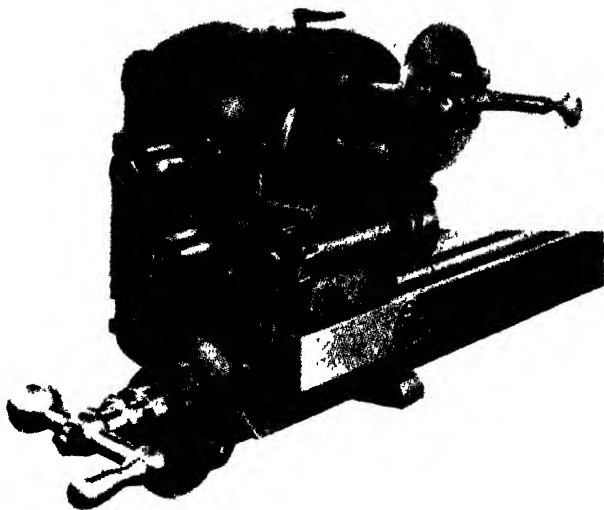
A Brown & Sharpe index head geared for 250 divisions (two idlers).
